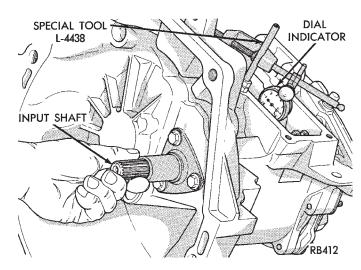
Checking Input Shaft Bearing End Play to Determine Shim Thickness
